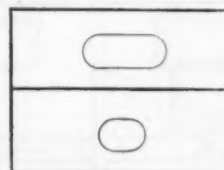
Showing Shape of Holes in Upper and Lower Tuyere Blocks.
